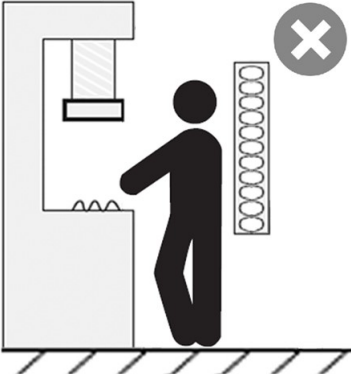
The operator is between the sensor's detection zone and the hazardous zone of a machine.
